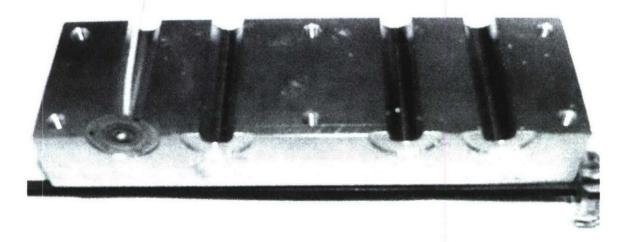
Half of the candle mold used to manufacture paraffin wax candles. The wick and wick stand are shown in place in the left-most candle mold.
